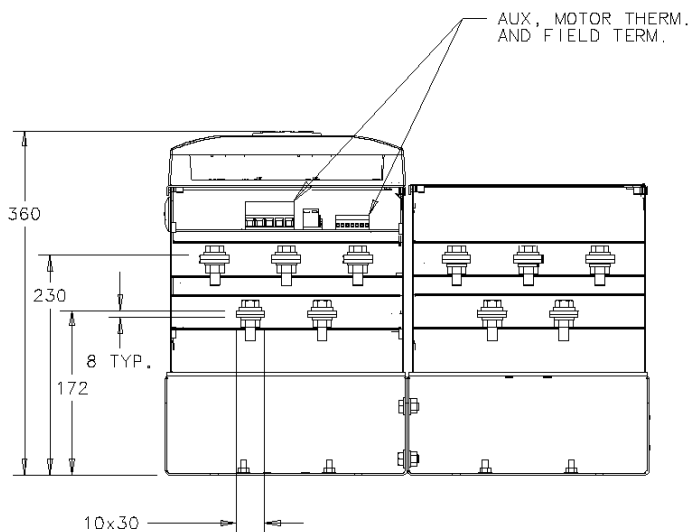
Frame 5 : 1580A Stack Assembly – Drg No. HG466700U110
